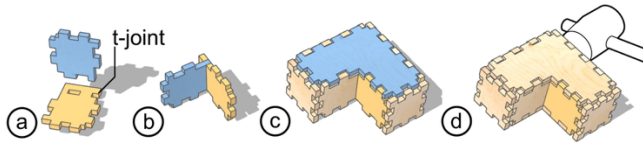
(a) Extending the box joints of the golden plate into a T-joint makes complete intrusion and a 90° angle easy. (b) In this orientation, (c) users complete the rest of the assembly and insert the top and bottom plates. (d) All other plates are convex, which allows fixing intrusion late.
